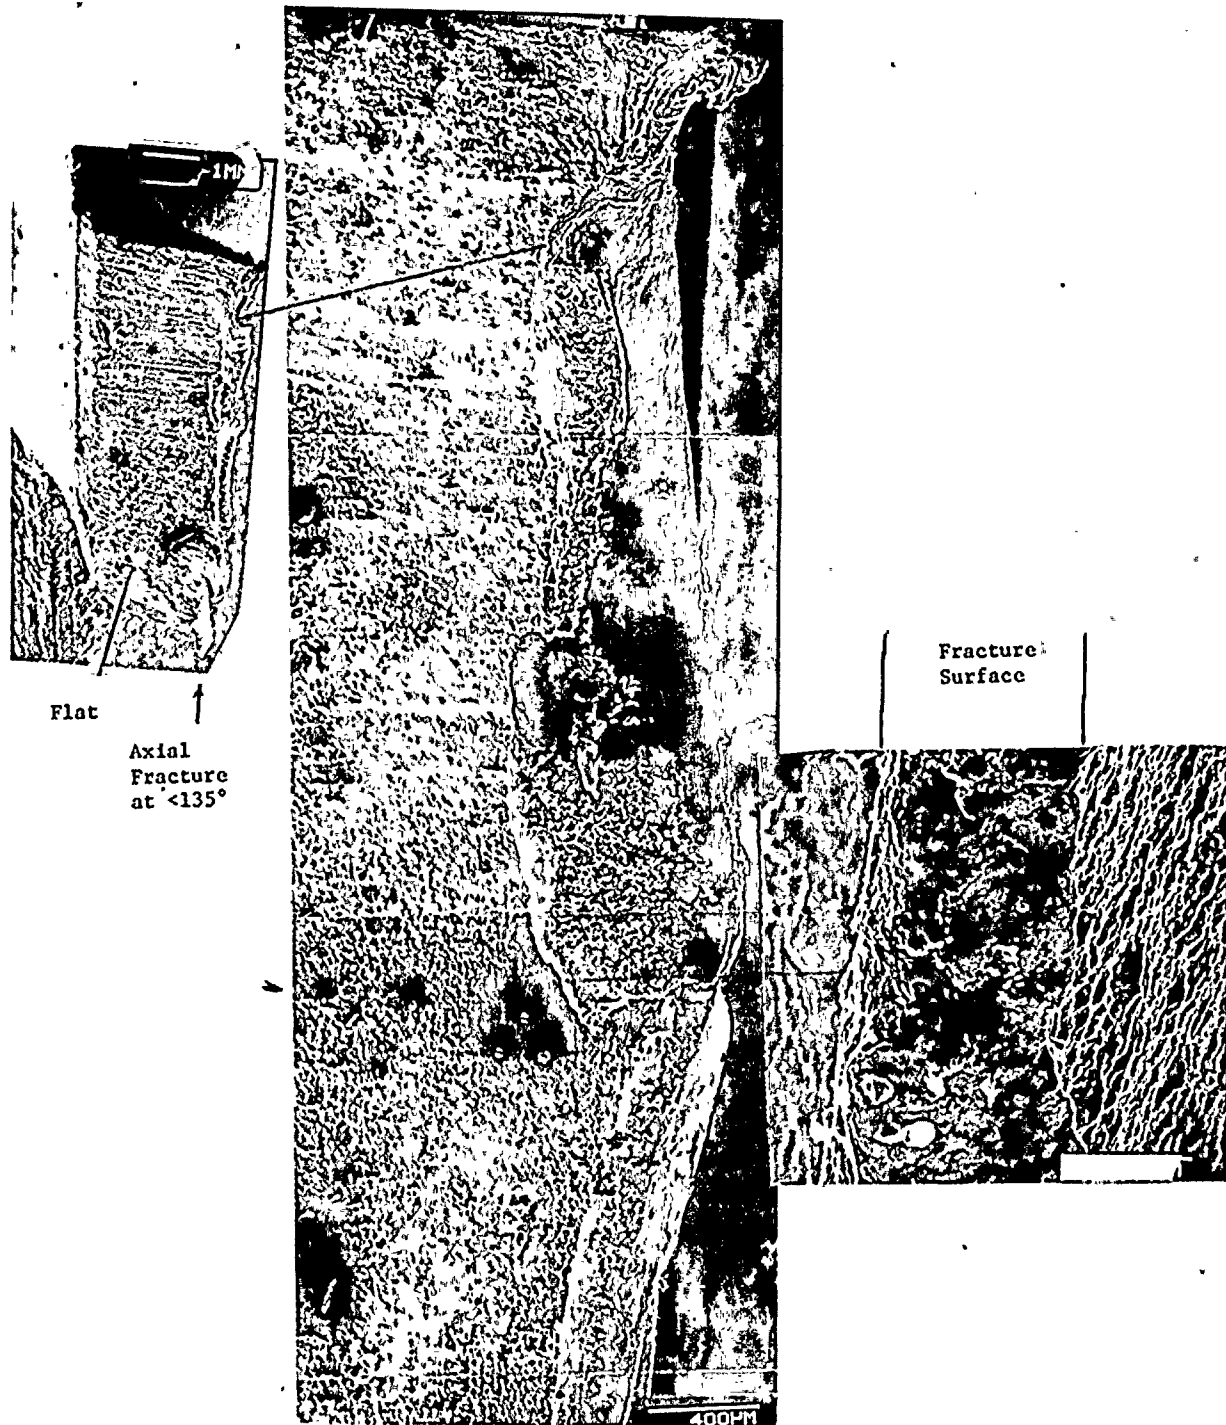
Fractography on $<135^\circ$ axial fracture
